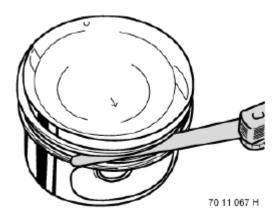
Measuring Axial Clearance Of Piston Rings Courtesy of BMW OF NORTH AMERICA, INC.
